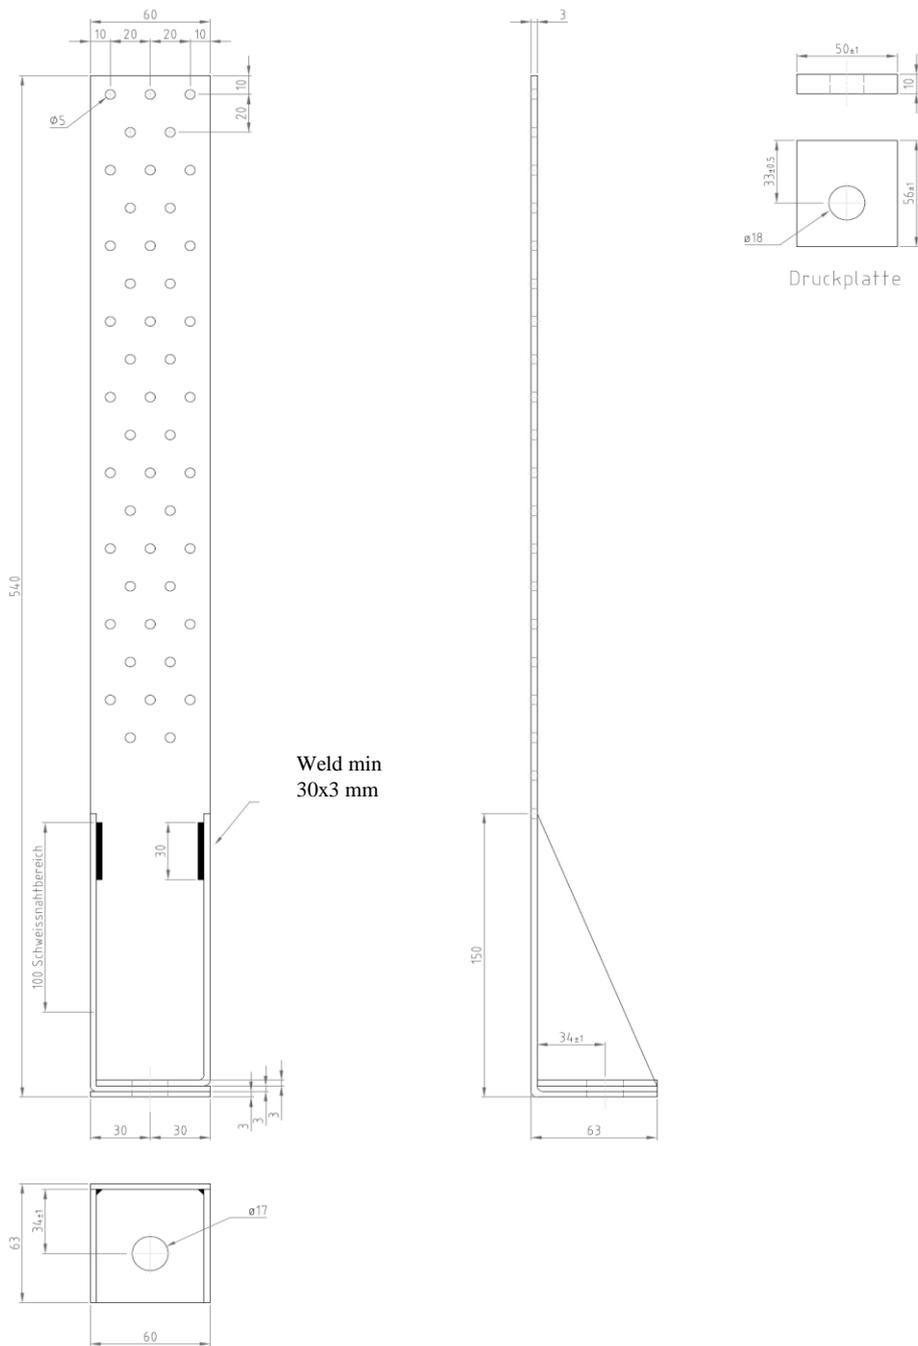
Dimensions of type GH HT28 60/540 (drawing with washer 56x50x10)
